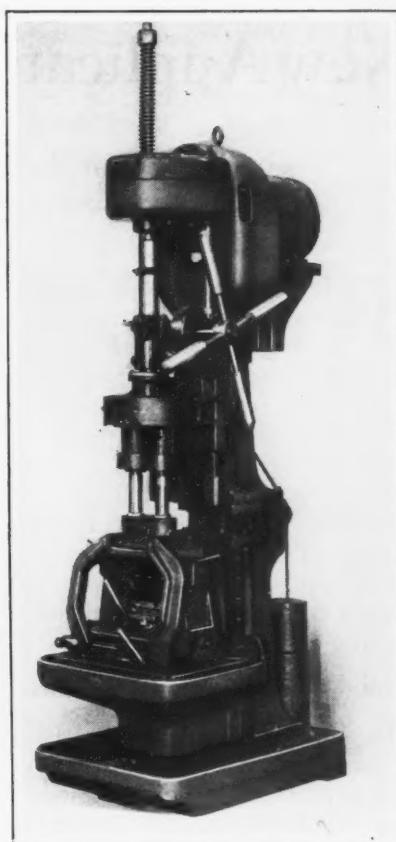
Equipment Employed for Boring the Cylinders in the Engine Block, Two at a Time
